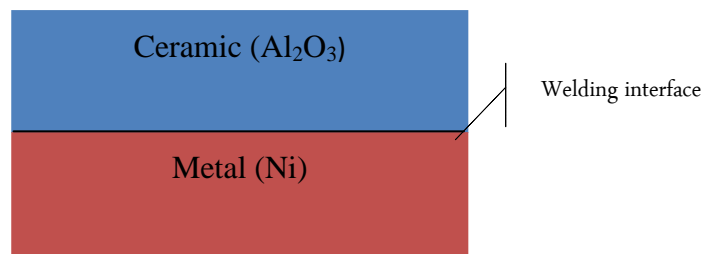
Exposing of Alumina to Nickel by welding.
